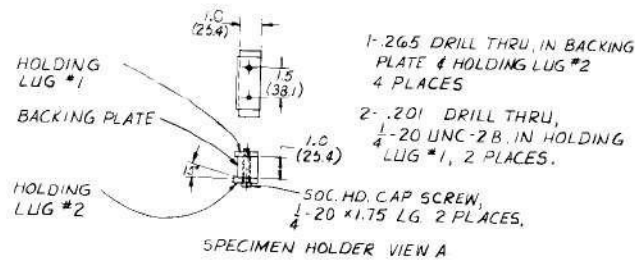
Dry Sand/Rubber Wheel Abrasion Test Apparatus
